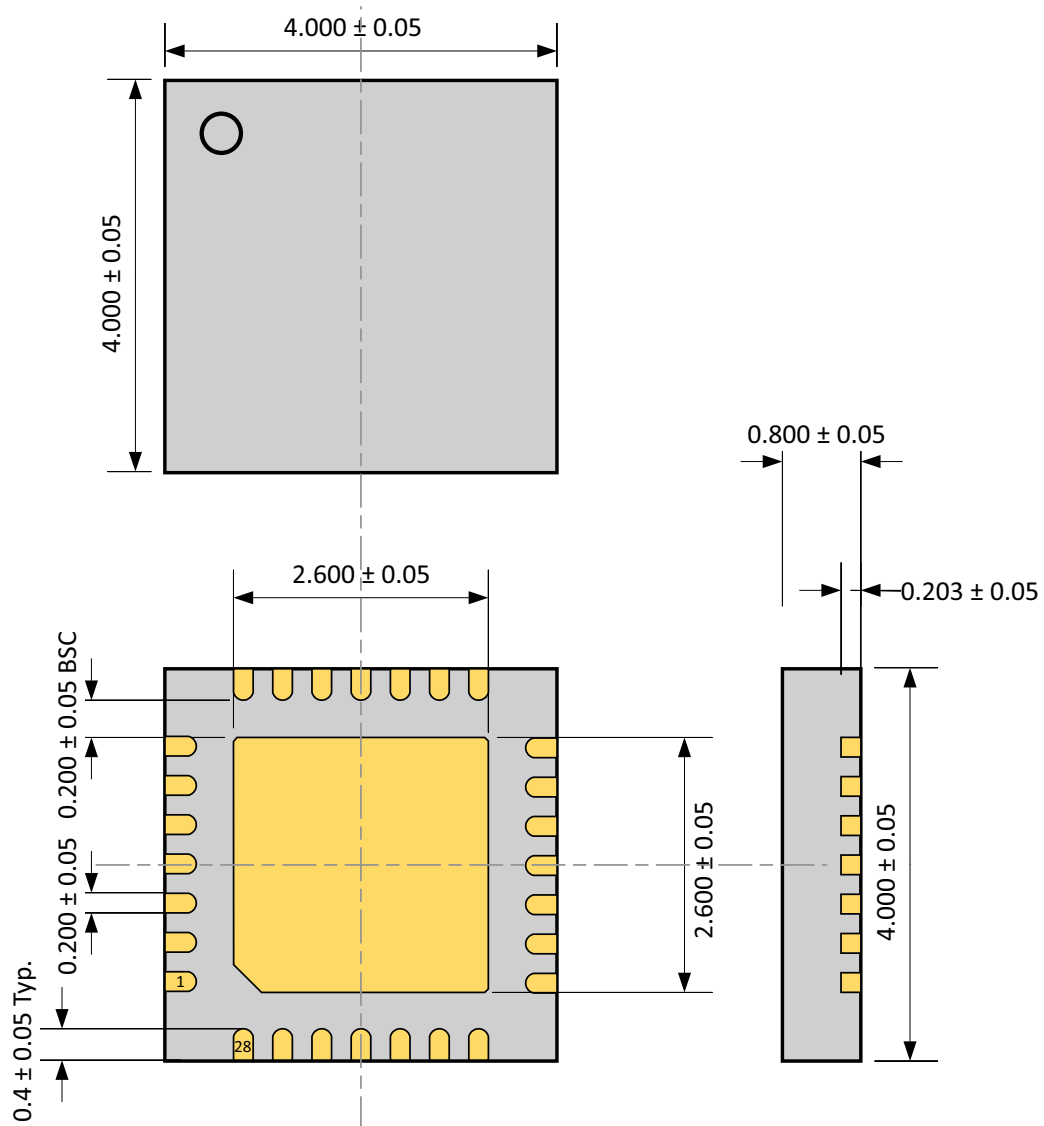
QFN 28-pin 4x4mm Drawing (All Dimensions in mm)
